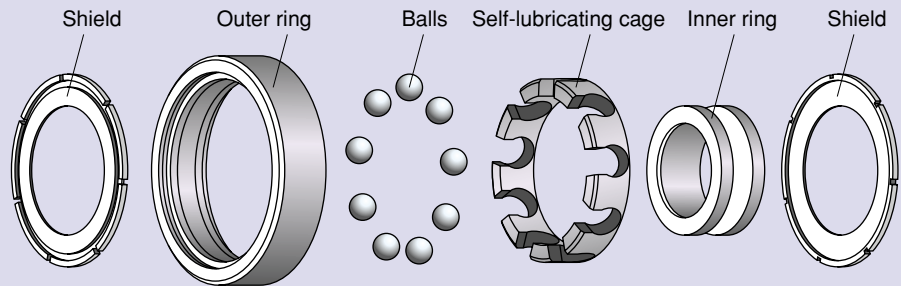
Structure of deep groove ball bearing with self-lubricating cage type
